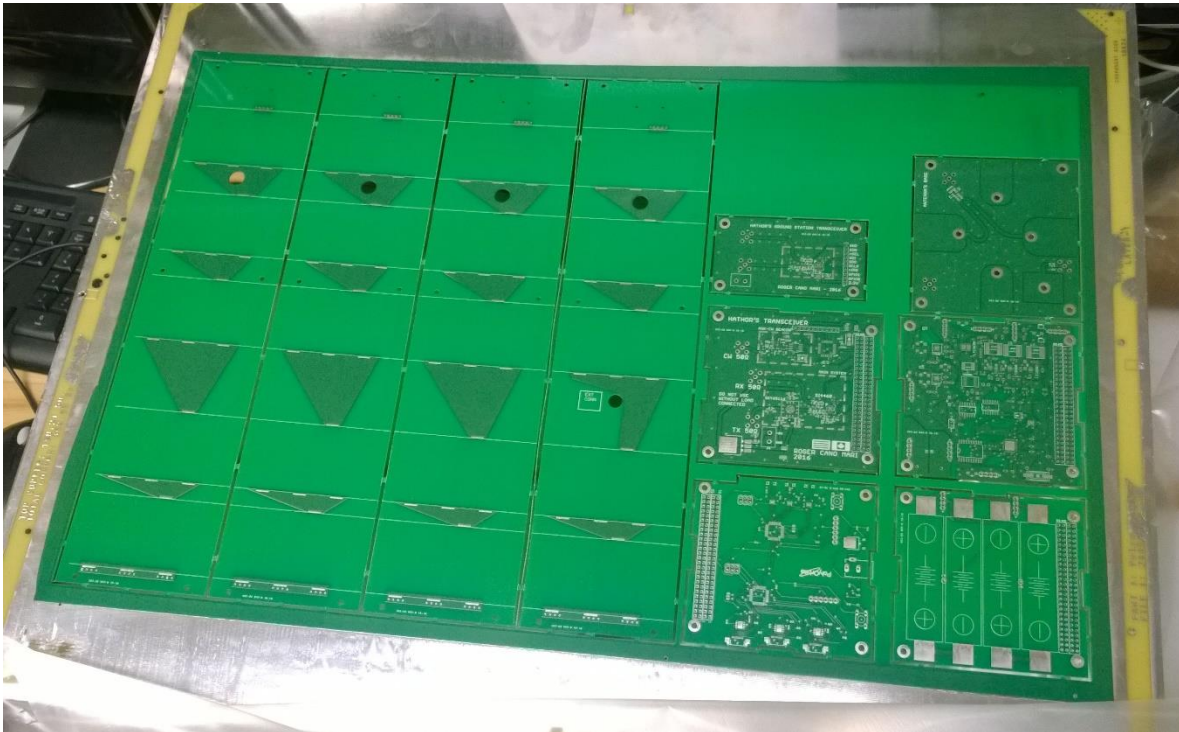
Big PCB board once arrived in middle April 2016.
